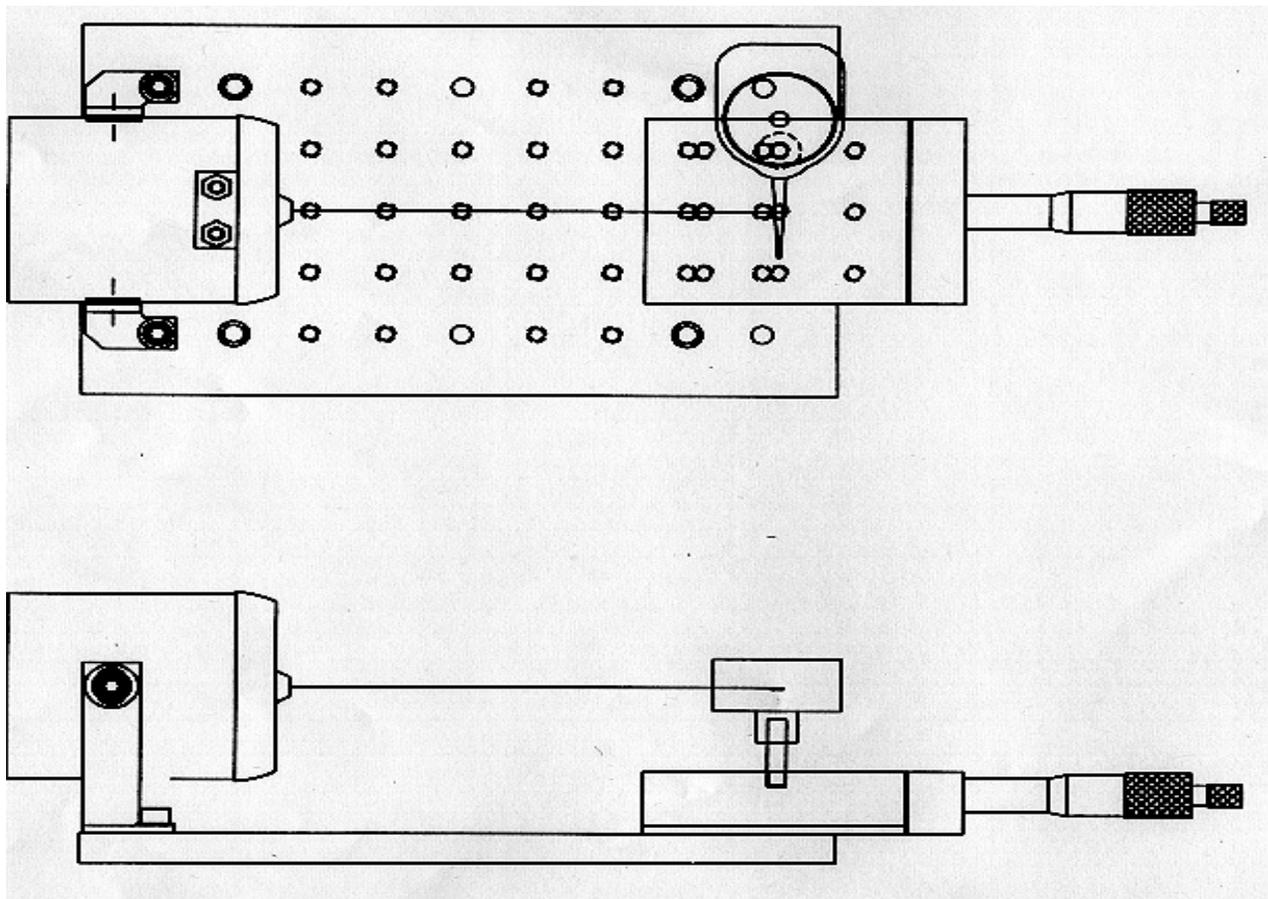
Fatigue Fixture, applying force across the cross section of the wire.
